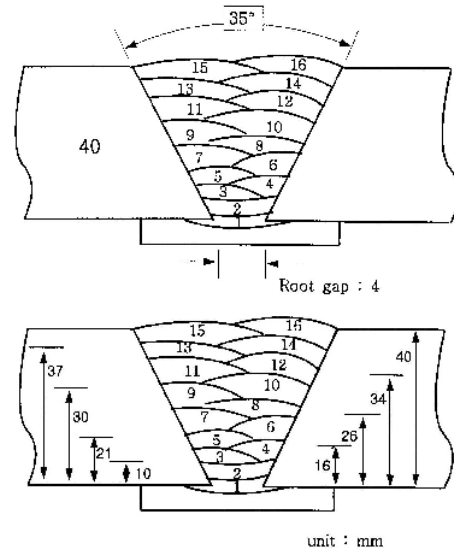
Schematic diagram of weld deposit metal.
